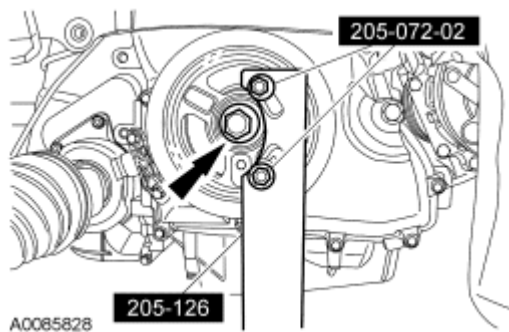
Using Special Tools (205-126 And 205-072-02)
